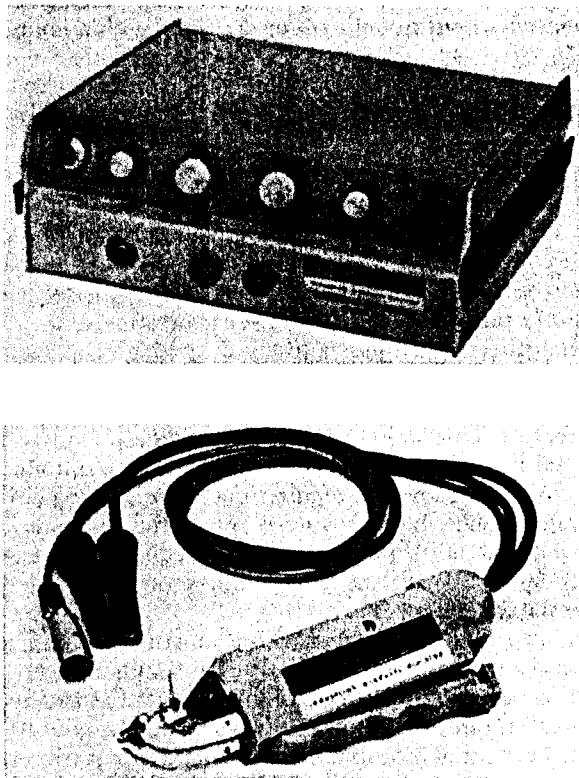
A Portable Capacitor Discharge Percussion Welding Power Supply and Hand-Held Gun
